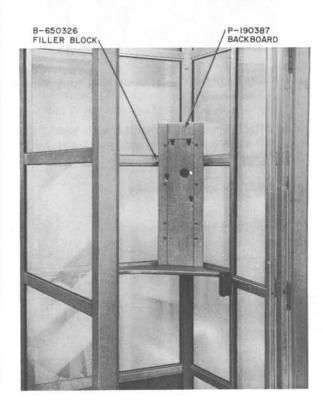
KS-16797 Universal Booth with B-190387 Backboard
